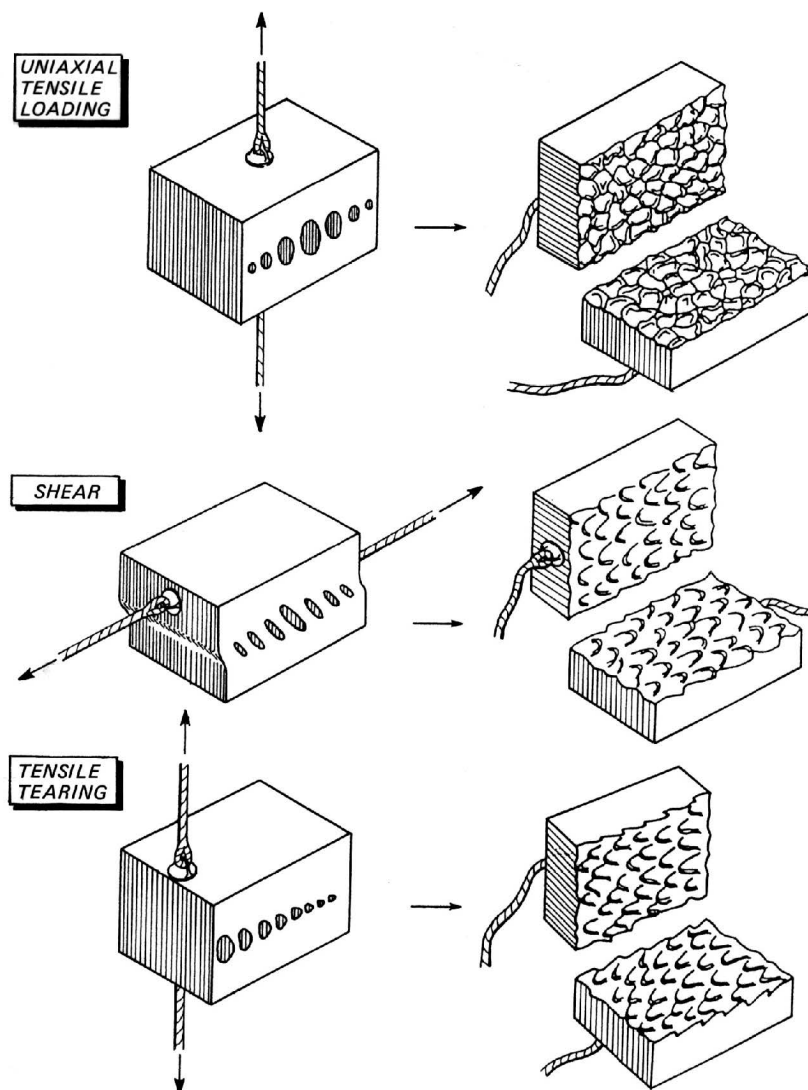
Dimple formation owing to uniaxial tensile loading, shear and tensile tearing [51]
